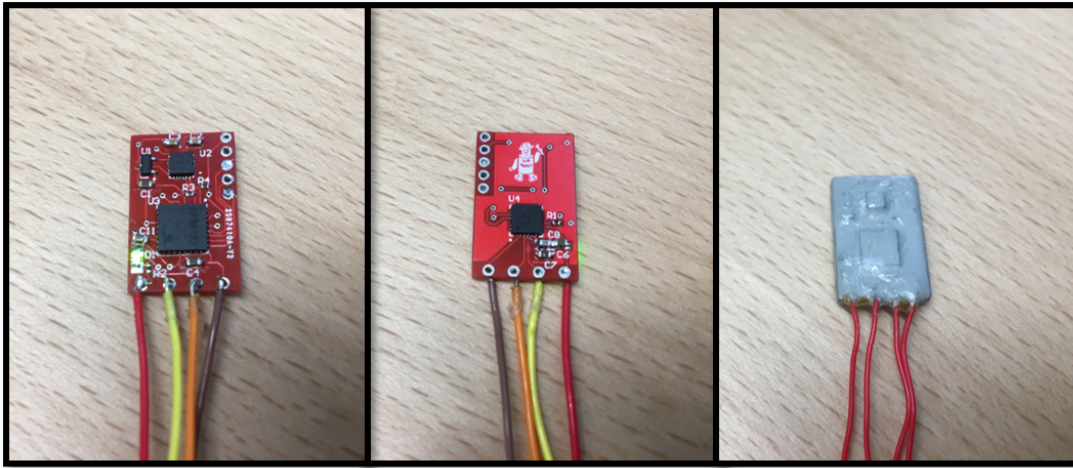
DH sensor card v2. Front-, back side and epoxy seal.
